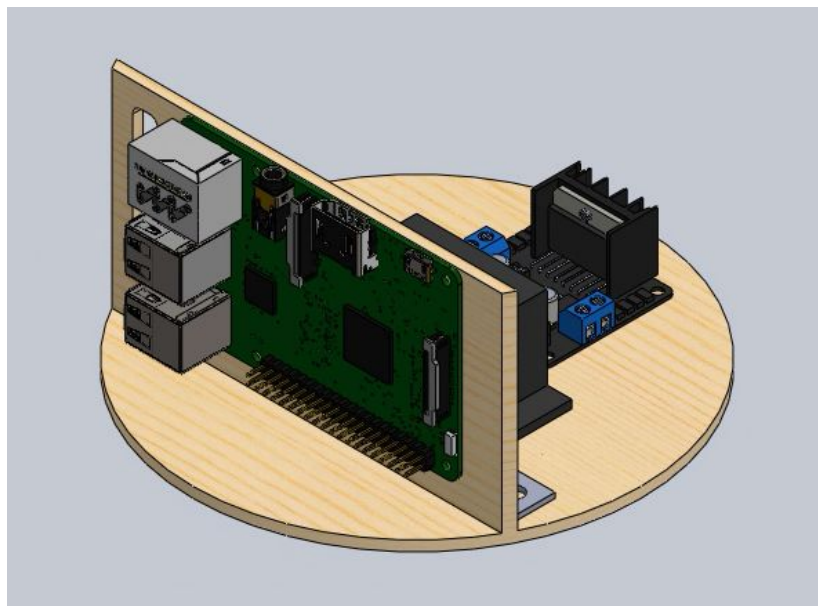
Isometric view of payload bay, including Raspberry Pi, battery, servo motor, and stepper motor driver
